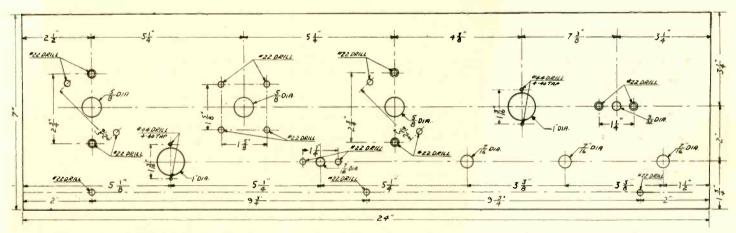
Detail of front panel. The three holes along lower edge are for wood screws which fasten panel to baseboard.
